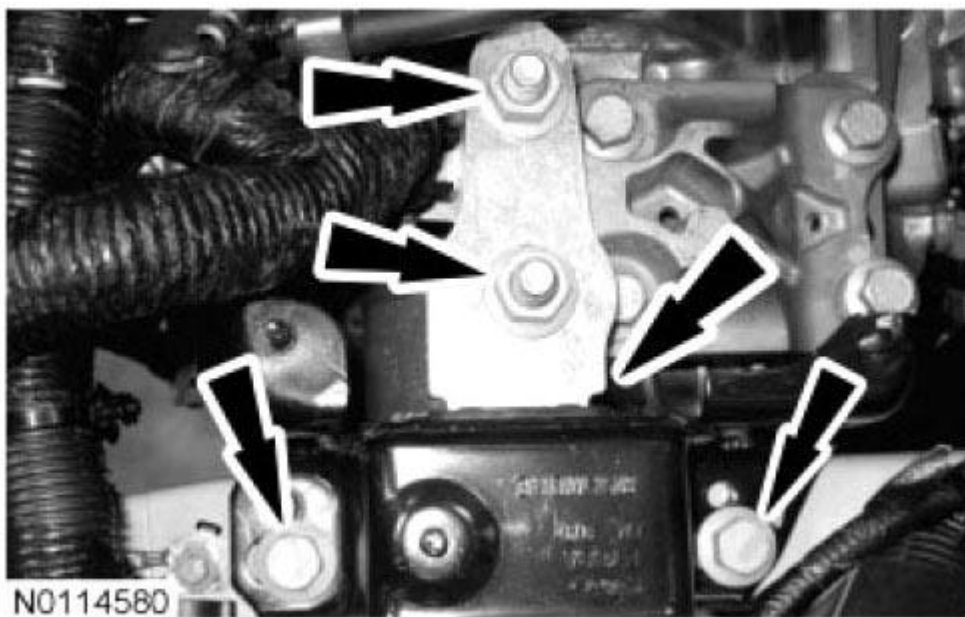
Locating Transaxle Support Insulator Bolt And Nuts
